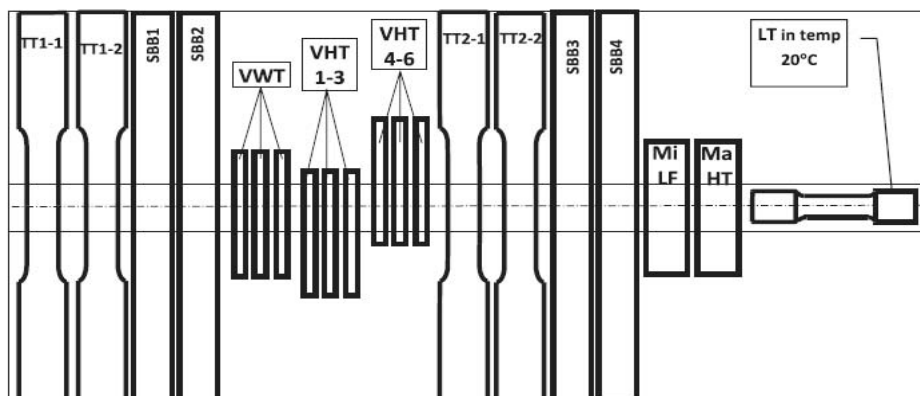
Places of collecting samples from the sample plates. TT– tension-torsion, SBB – surface band bending, Mi – micro, Ma – macro, VWT, VHT – notch impact value, HT – hardness testing, LF – ferrite number, LT – tension of weld metal [15,22]
